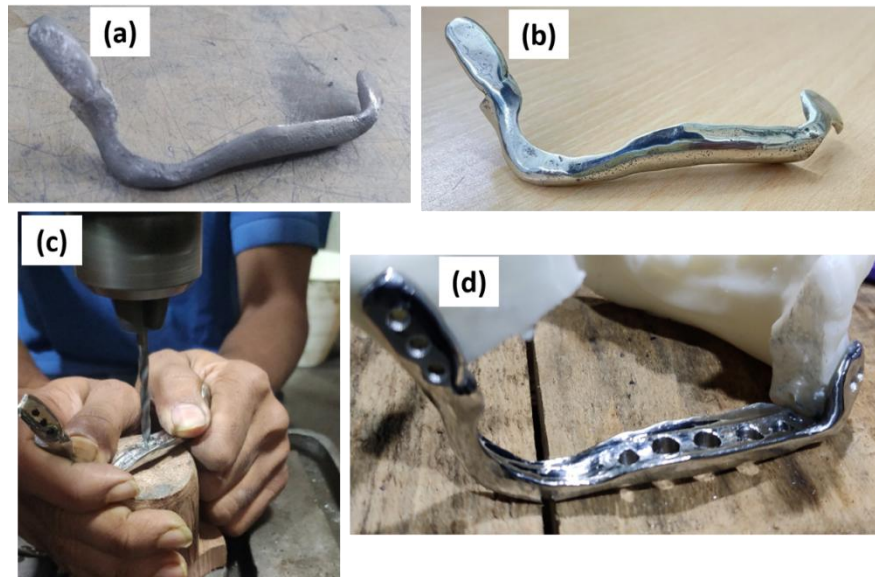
(a) casted implant, (b) implant after surface finishing, (c) drilling holes and (d) final implant with holes
